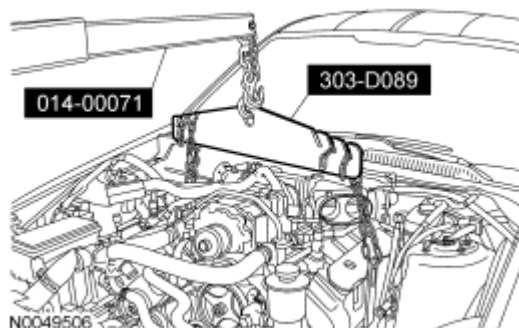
Identifying Special Tools (014-00071) & (303-D089)
